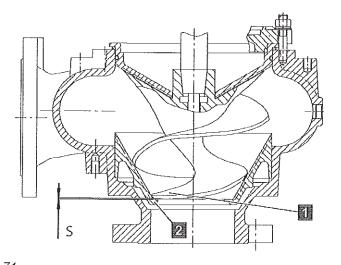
Impeller clearance "S" is clearance between impeller tip (1) and wear ring (2).
